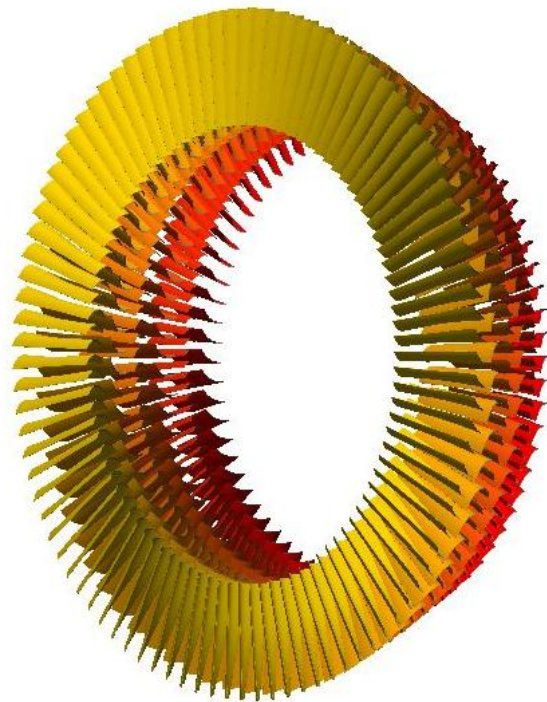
T-AXI three-spool IPT blading, exit view
